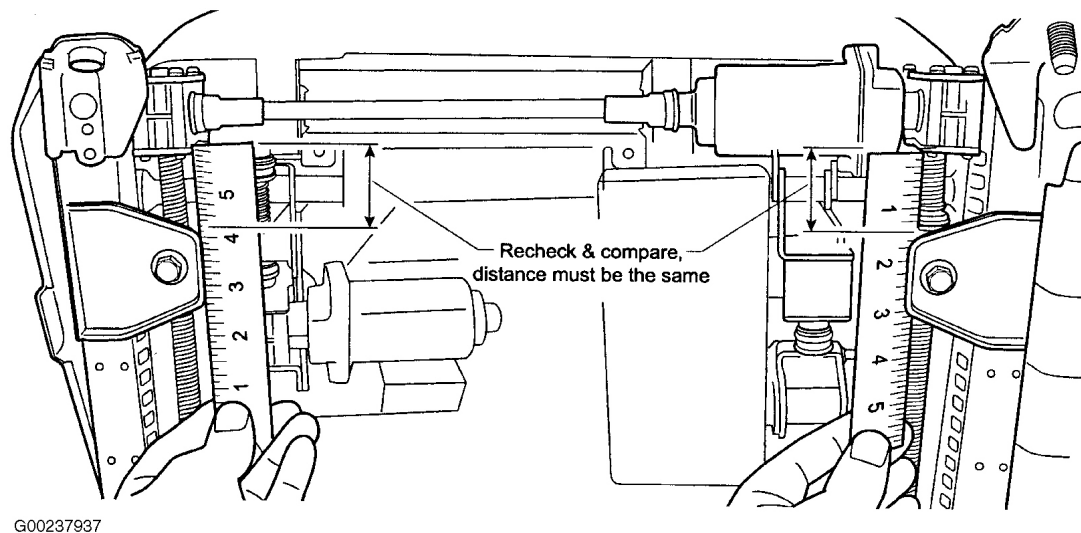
Rechecking Gear Case to Mounting Tab Distance
